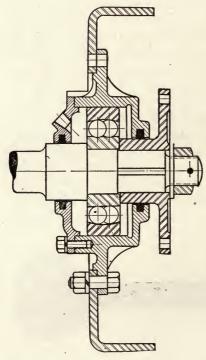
Lippard Stewart Propeller Shaft Mounting.
